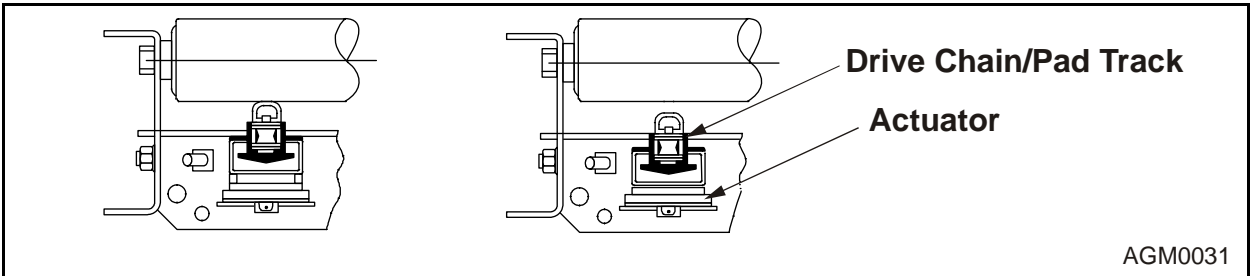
1 Drive Chain/Pad and Track - Raised (left), Lowered (right)
